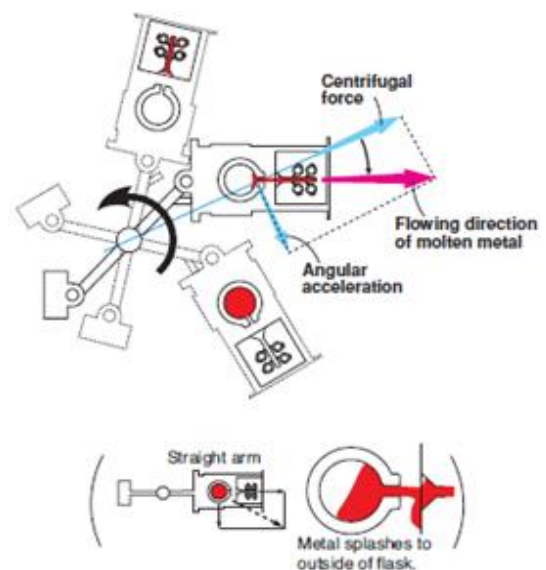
Machine & Scheme of the process of centrifugal casting under vacuum
